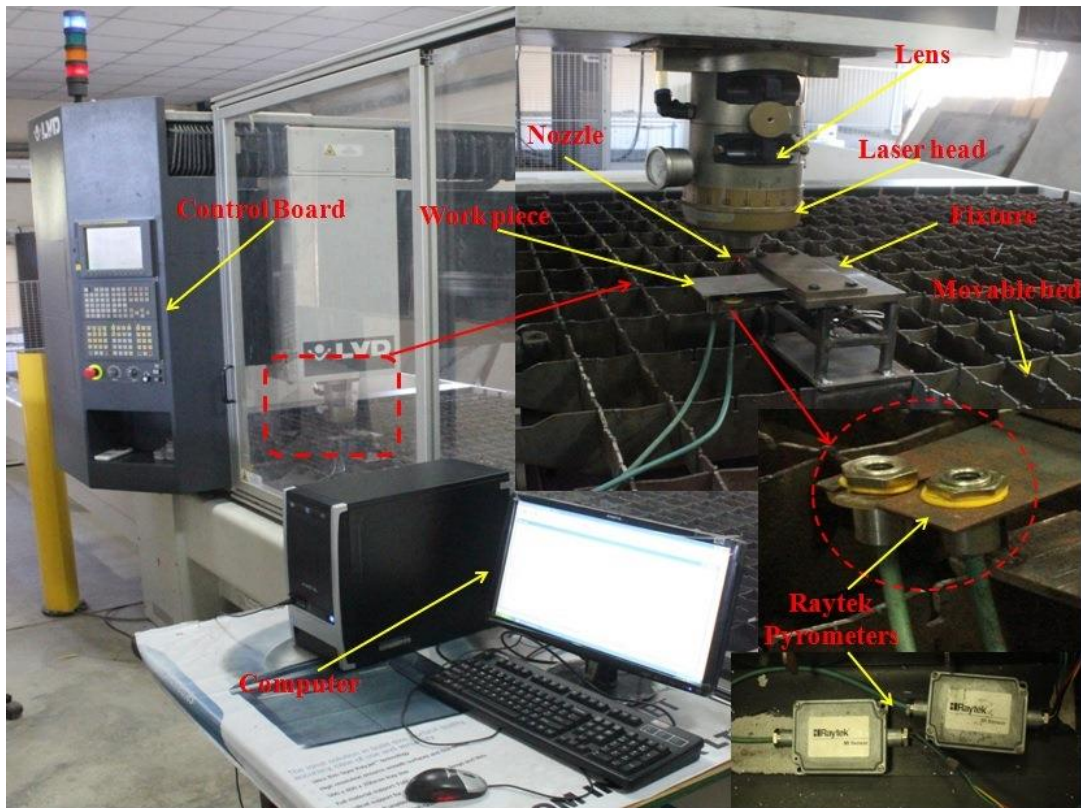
Experimental setup for measuring temperature from bottom side of the workpiece by using pyrometers
